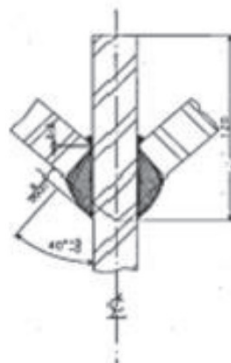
(1) Cruciform full penetration welded joints in a bi-lobe tank in way of centreline bulkhead
